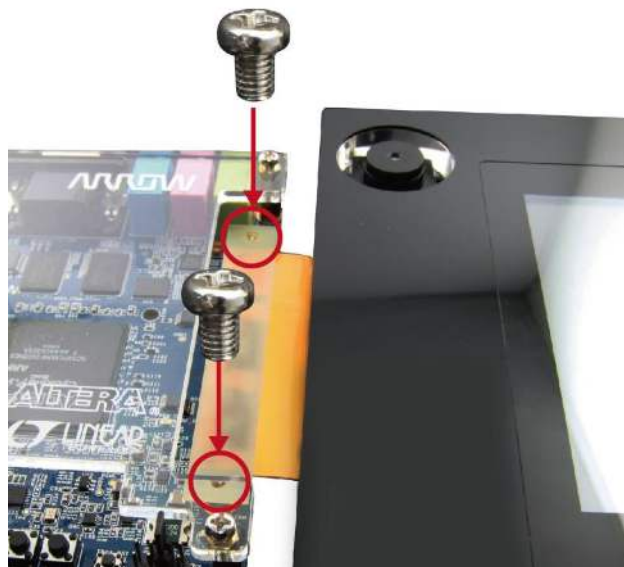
Fasten screws through the HSMC cable to the copper pillars
